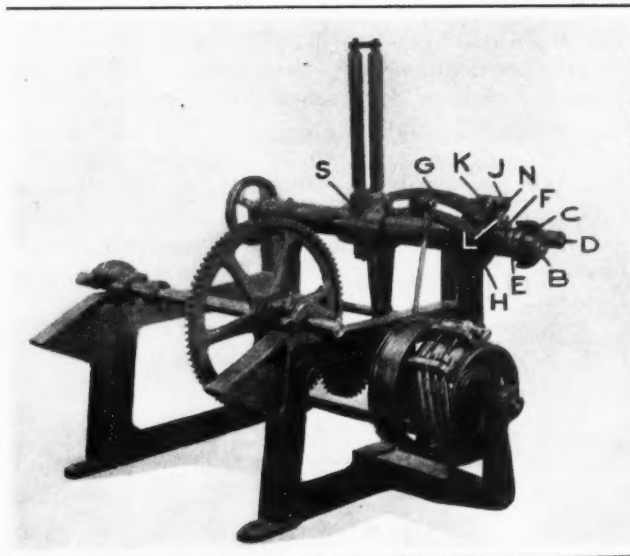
Mechanism Similar to One Shown in Fig. 2, but for 30-inch Spool
